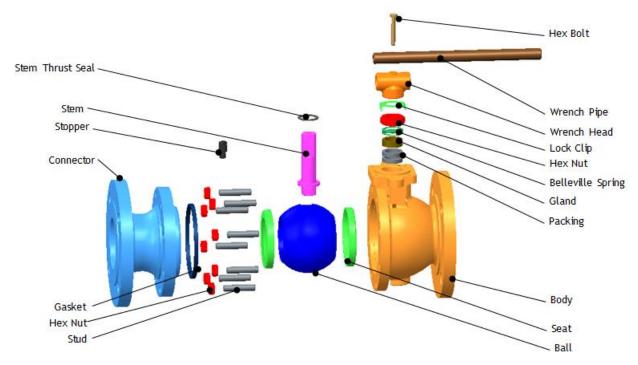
Two Piece Ball Valves - Wrench Operated (DN65 FB - DN150 FB)
